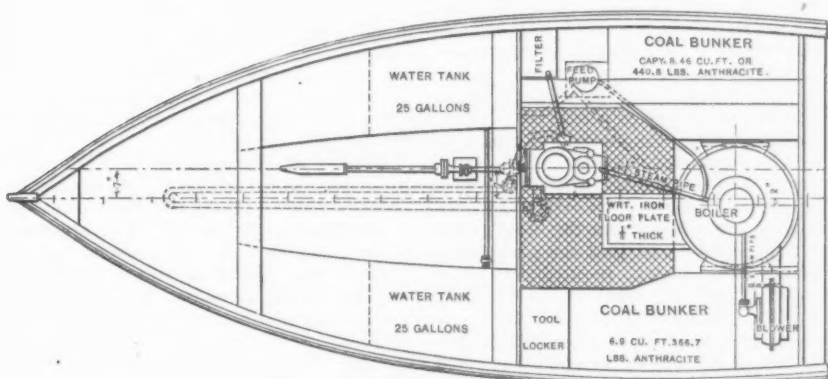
Half Plan of U. S. Steam Whale-Boat.
